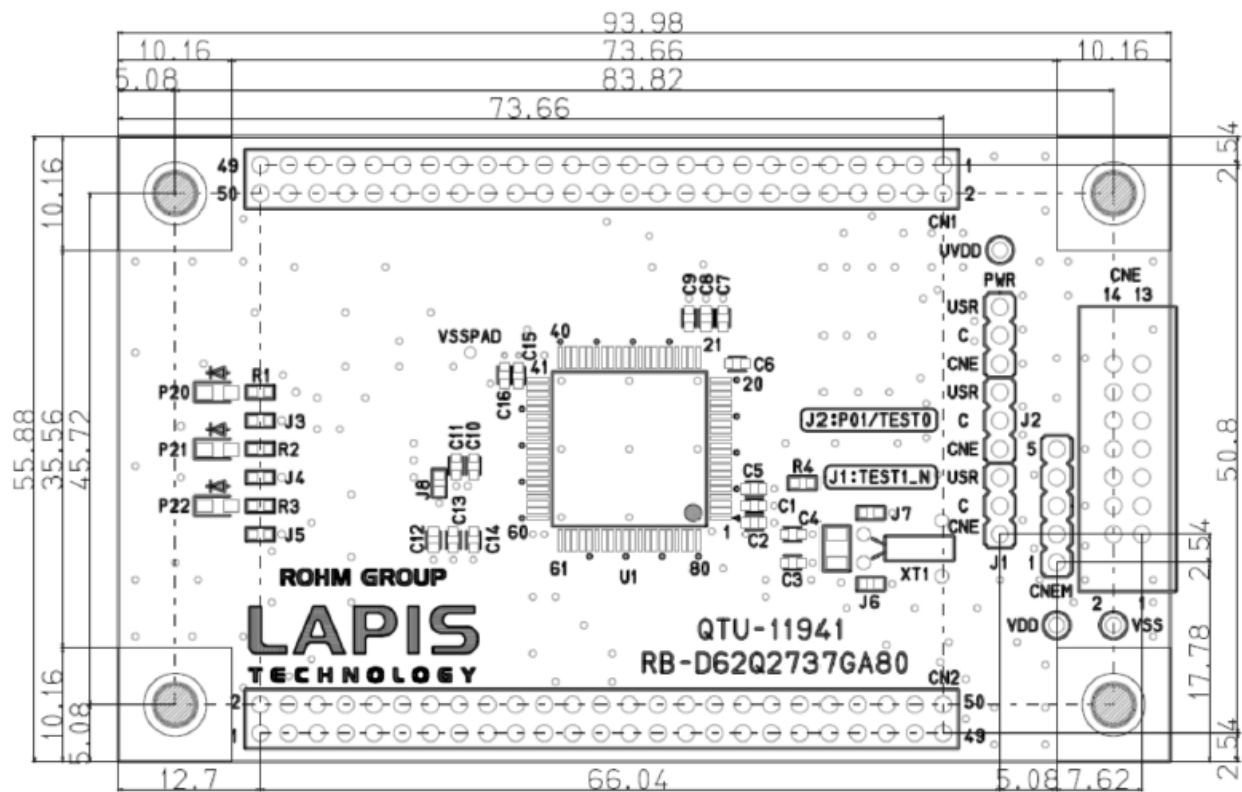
PCB dimensional outline diagram and layout of components (Top view)
